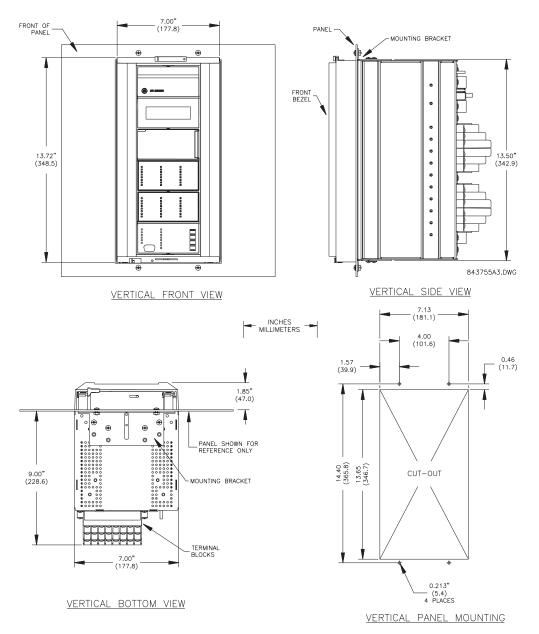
C60 VERTICAL MOUNTING AND DIMENSIONS
